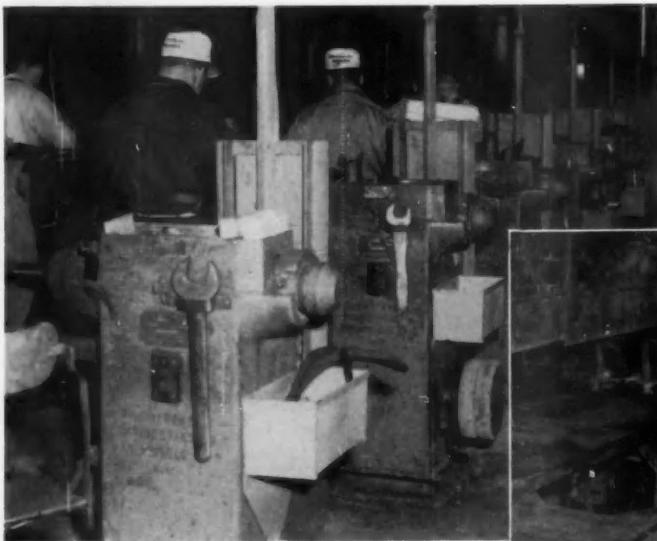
Upper and lower sections for windshield reveal moldings are advanced on the belt, in the foreground, to this precision built welder, in which they are joined after clamping in holding dies.
